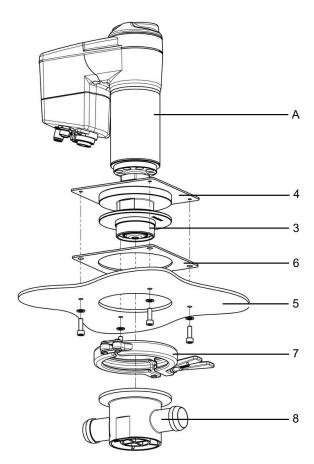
Assembling the pneumatic stainless steel actuator in the housing
